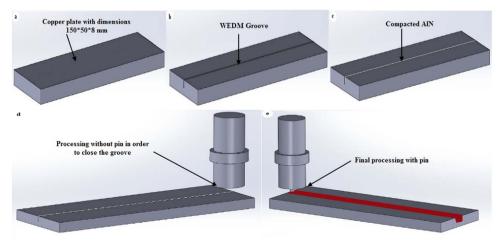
Diagrammatic view of FSP process (a) Cutting copper plate for required dimensions (b) Groove machining at the center of plate (c) Compacting AlN powder into the groove (d) Processing with pinless tool for groove closure (e) Friction stir processing.
